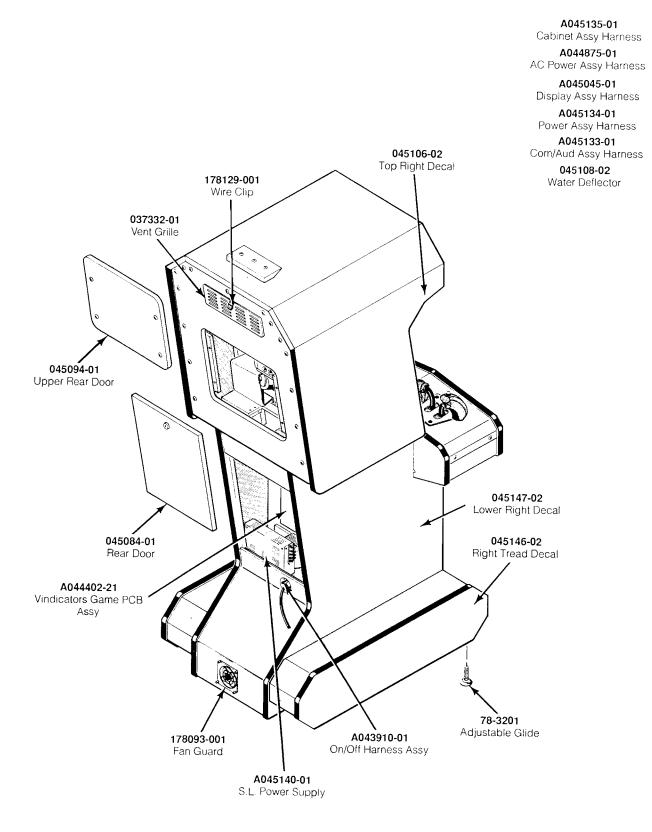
Cabinet-Mounted Assemblies, Continued
